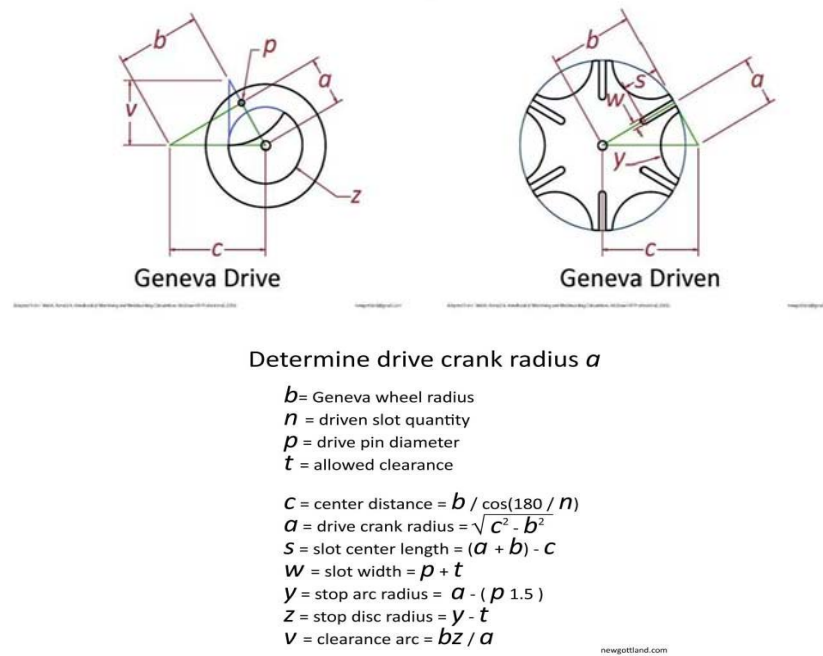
Geneva mechanism geometries utilized to design the Geneva gears in the final design.
